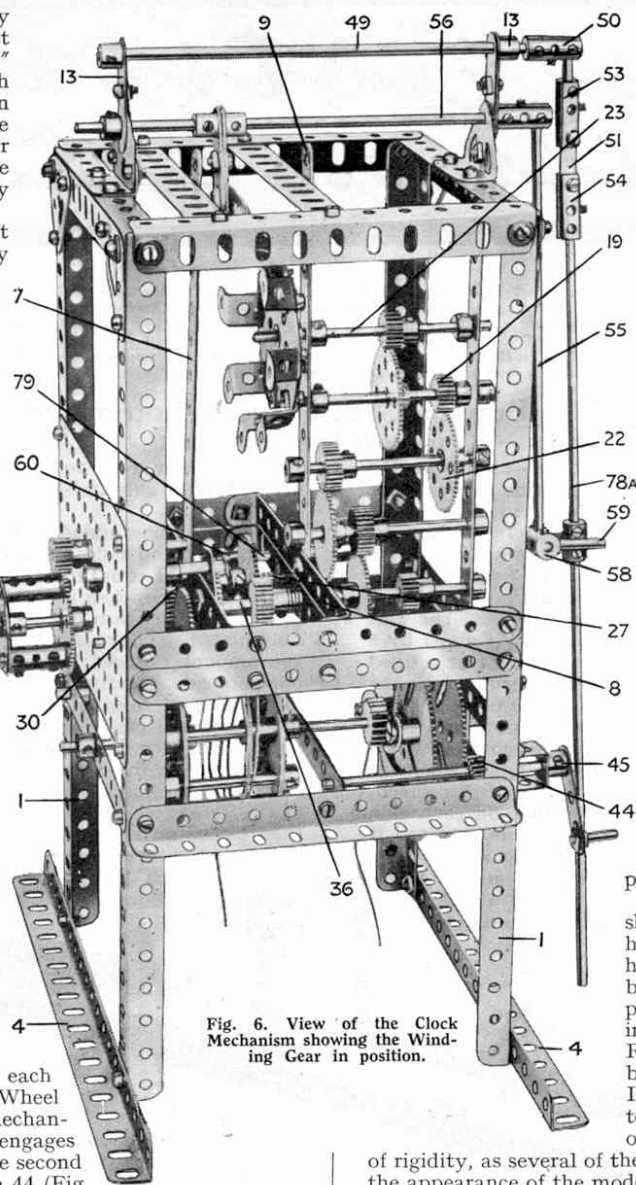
View of the Clock Mechanism showing the Winding Gear in position.
